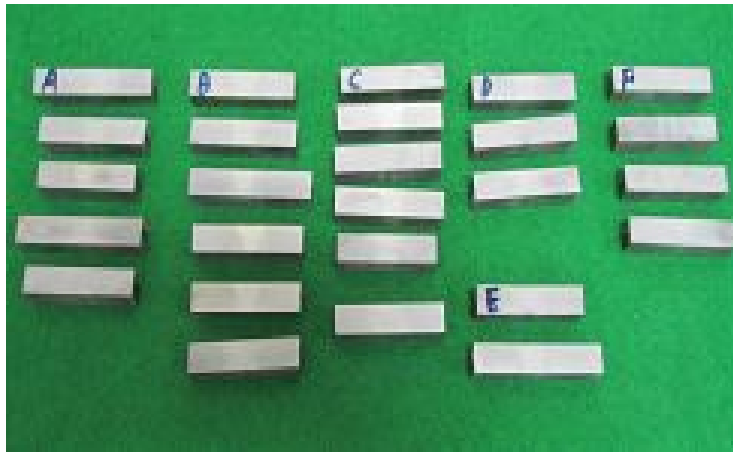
After fine grinding of welding macro structures in specimens
